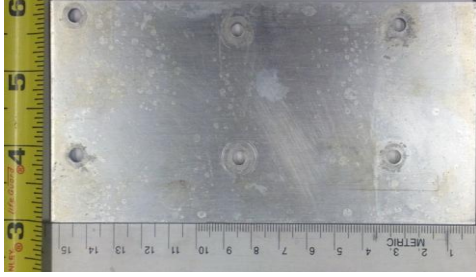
Corrosion panel sample on the uncoated side with 6 through rivet holes, AA 7075-T6.
